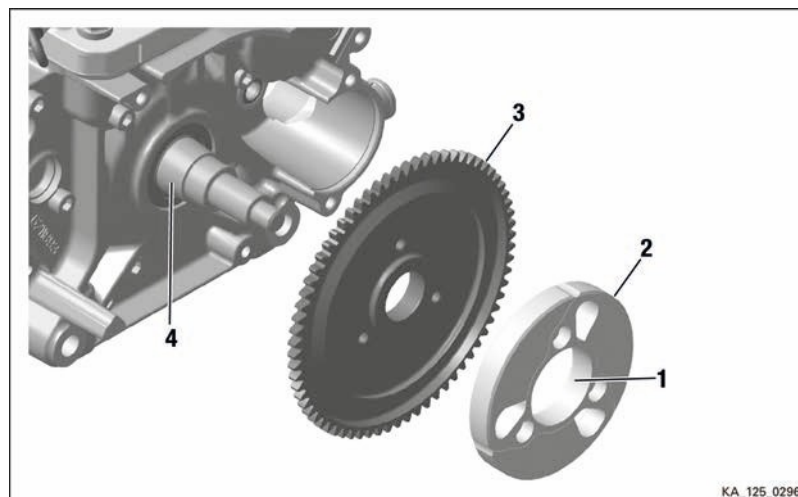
Clutch and starter gear assy. 離合器與啟動齒輪總成
